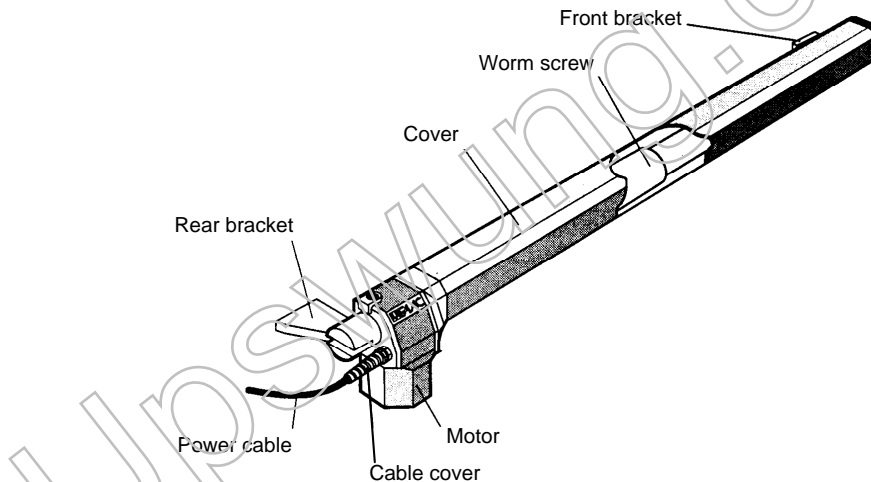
Parts of the 412 Compact Operator (SX model is shown)
